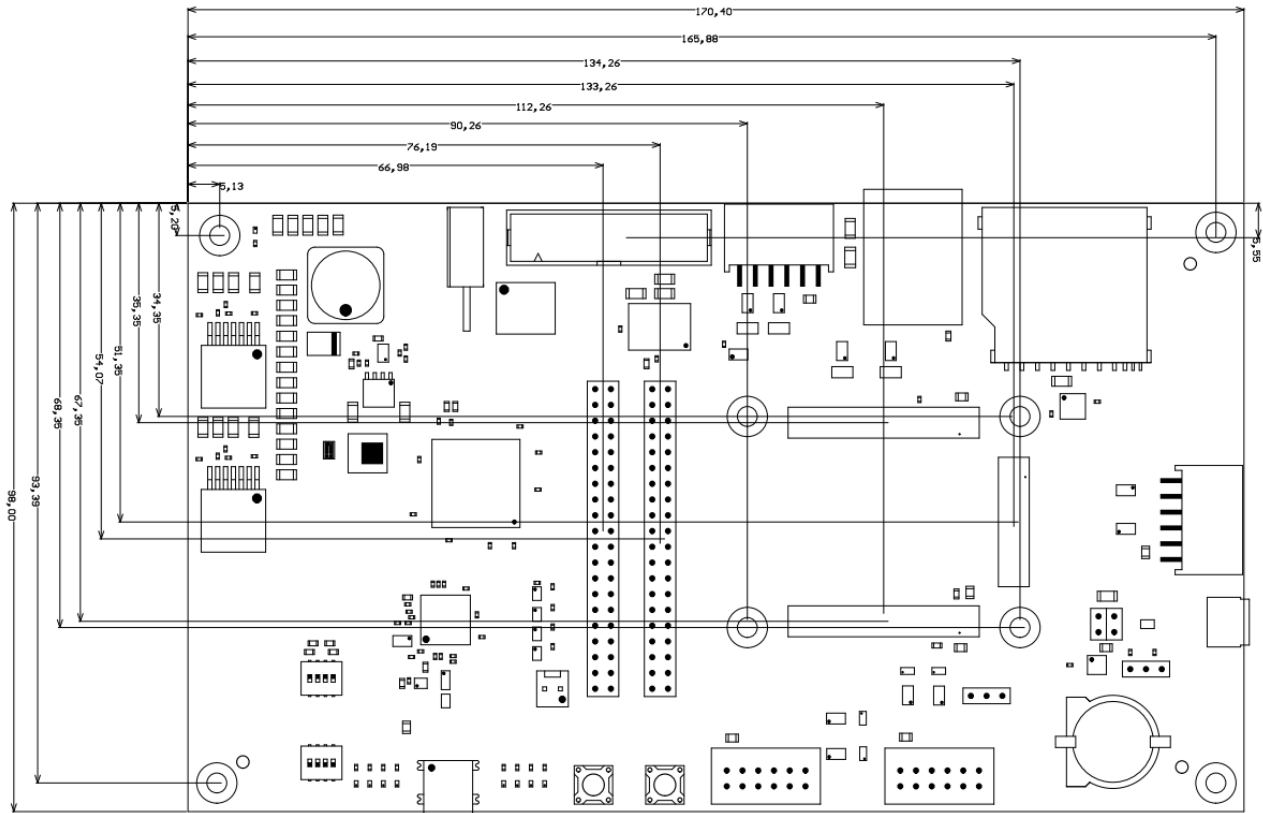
Physical dimensions of the TE0705-04 carrier board.
